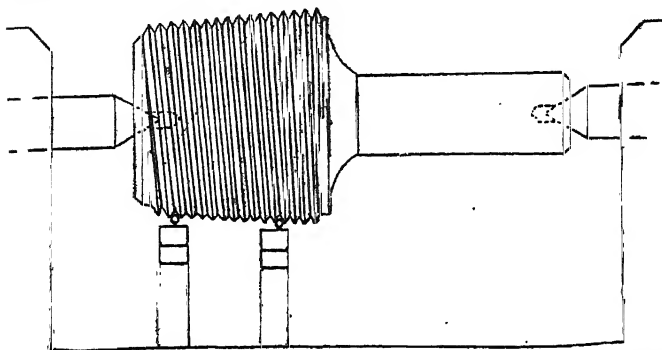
For the accurate measurement of cylinders in contact with the thread the arrangement shown above will suffice when thread-diameter machines are not available.
